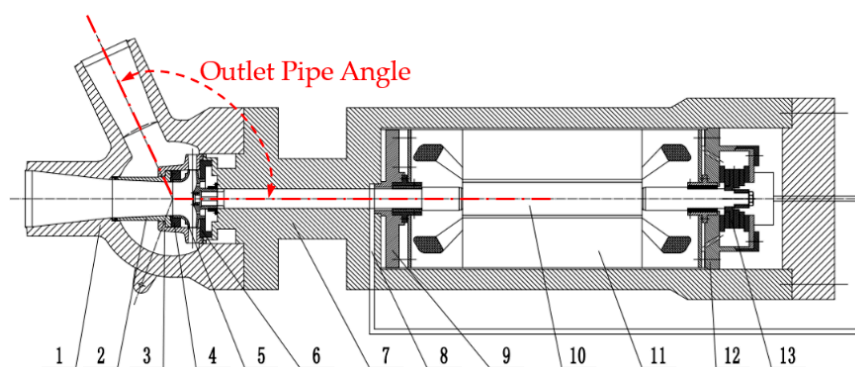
Structure of boiler circulating pump. 1 Pump casing; 2 connecting body; 3 guide vane; 4 front seal ring; 5 impeller; 6 rear seal ring; 7 motor housing; 8 cooling circuit; 9 front bearing seat; 10 rotor; 11 stator; 12 rear bearing seat; 13 thrust disk.
